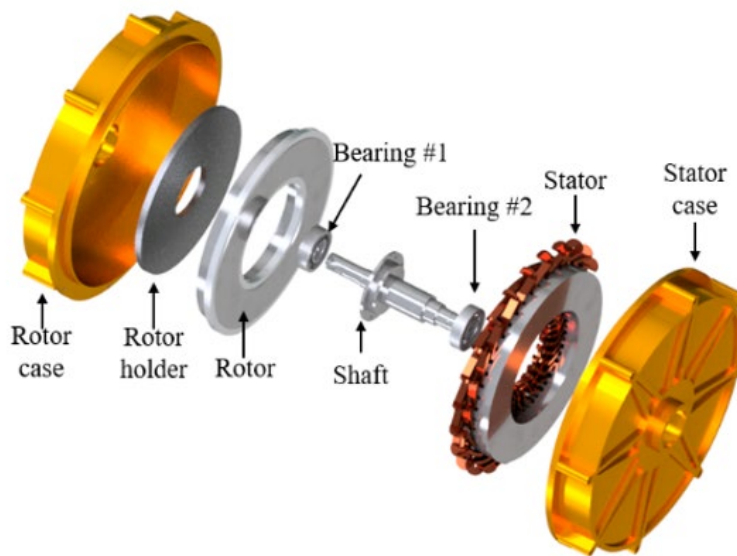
Exploded view of the proposed AFIM assembly showing key components, including the rotor case, rotor holder, bearings (#1 and #2), shaft, stator and stator case.
